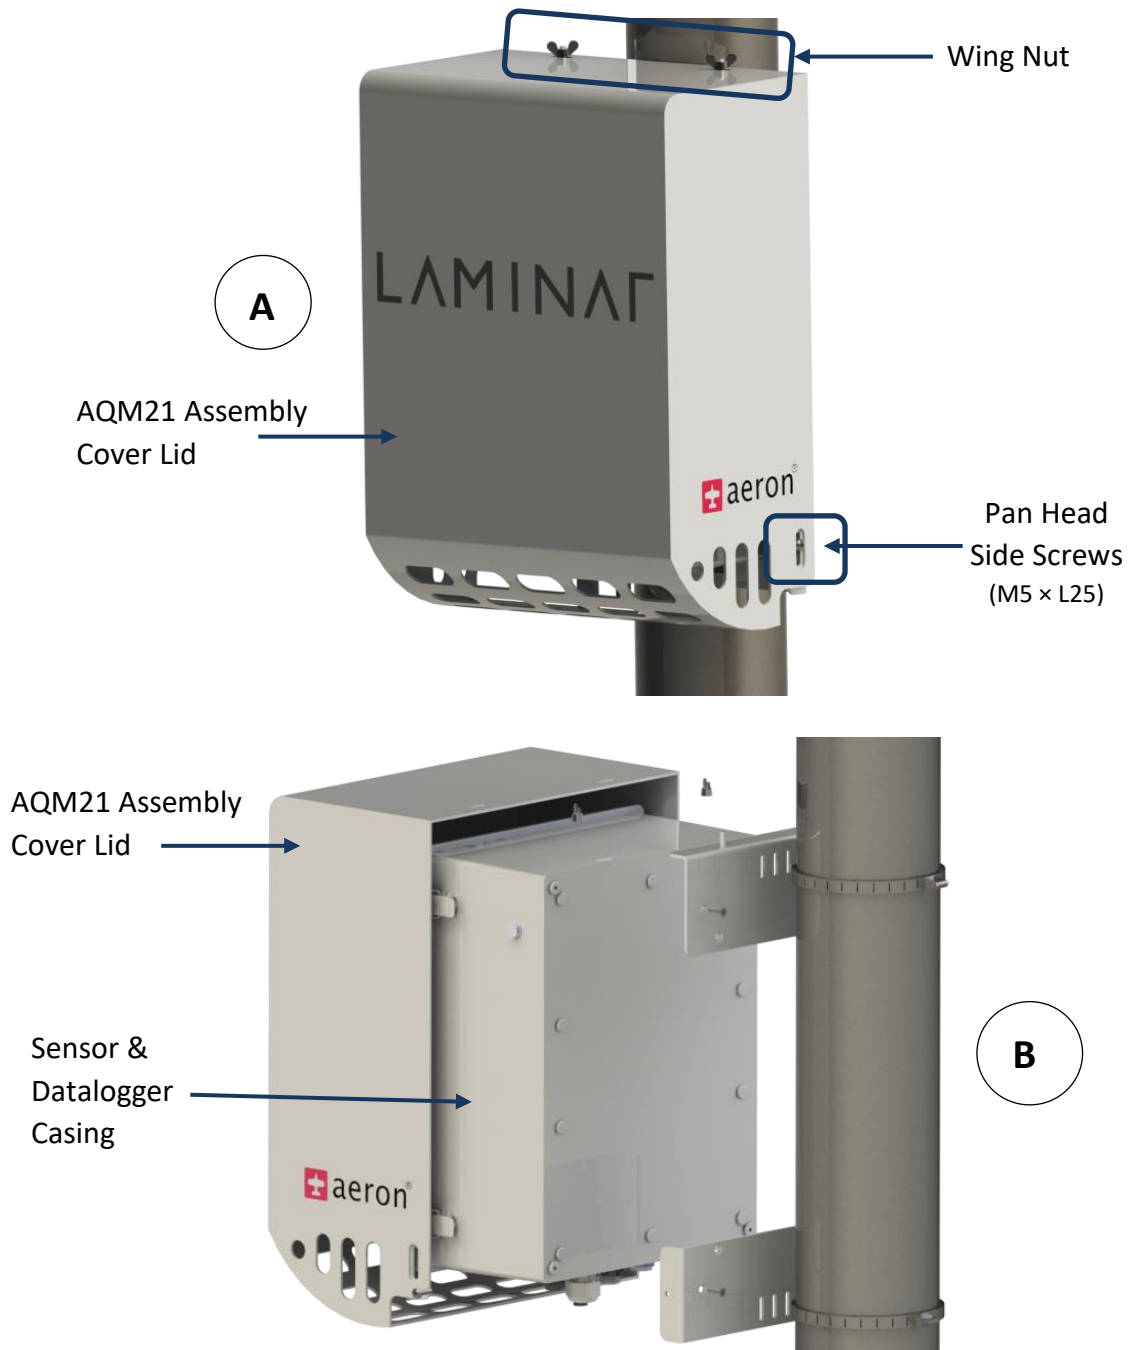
OPENING THE AQM21 ASSEMBLY - STEP 1
